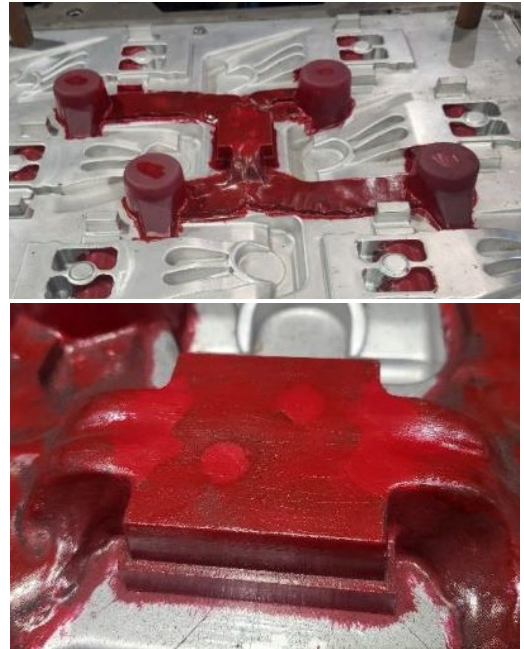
Shows the 3D printed pattern pieces with the 1.0" well, inserted onto the machined plate.
